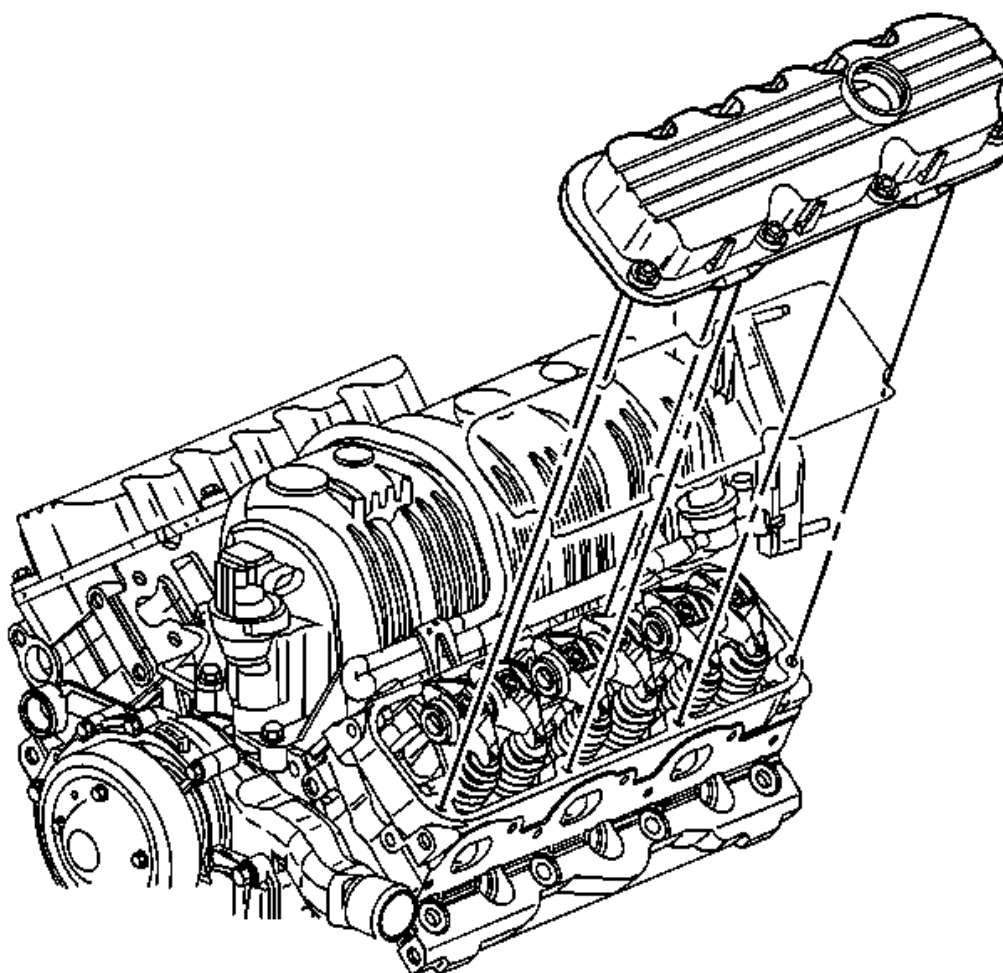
Removing Left Valve Rocker Arm Cover Bolts
